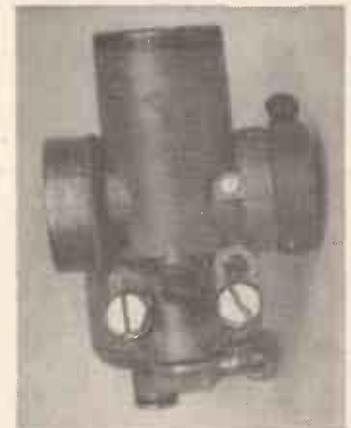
The carburetter, showing the air adjusting screw, above the right hand slotted hexagon and the throttle stop, between the two slotted hexagons.
